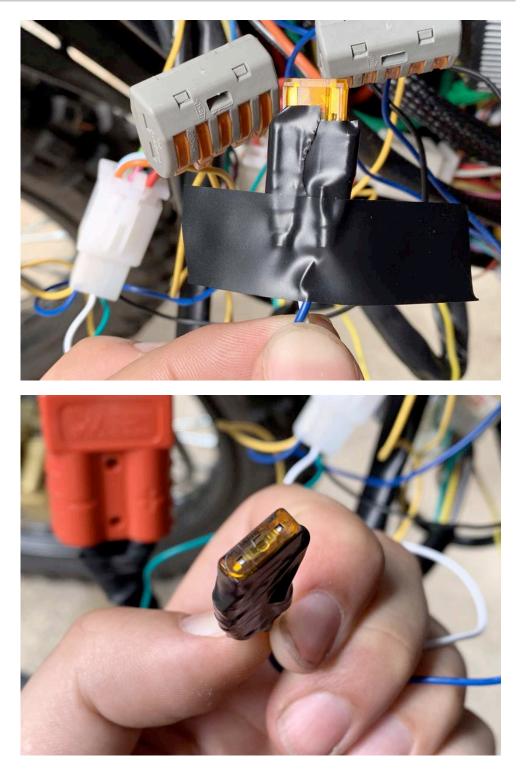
Protected Fuse Assembly – Left Indicator Fuse Assembly Shown
